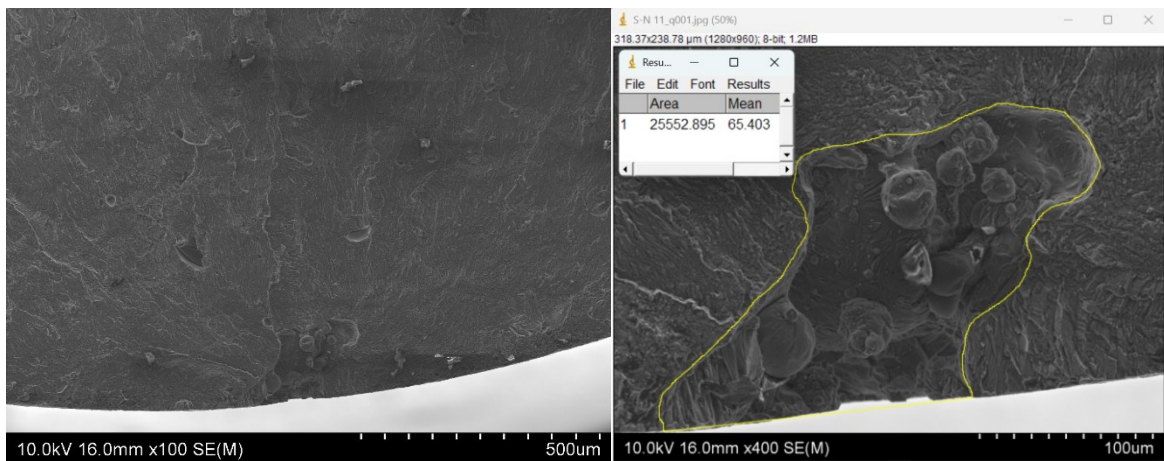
Fracture surface of sample CD//BD-HT-5 a) x50, b) x400.
